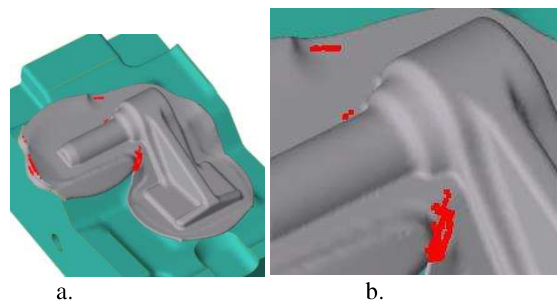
The finish forging using the developed preform: (a) general view, (b) magnified fragment.
